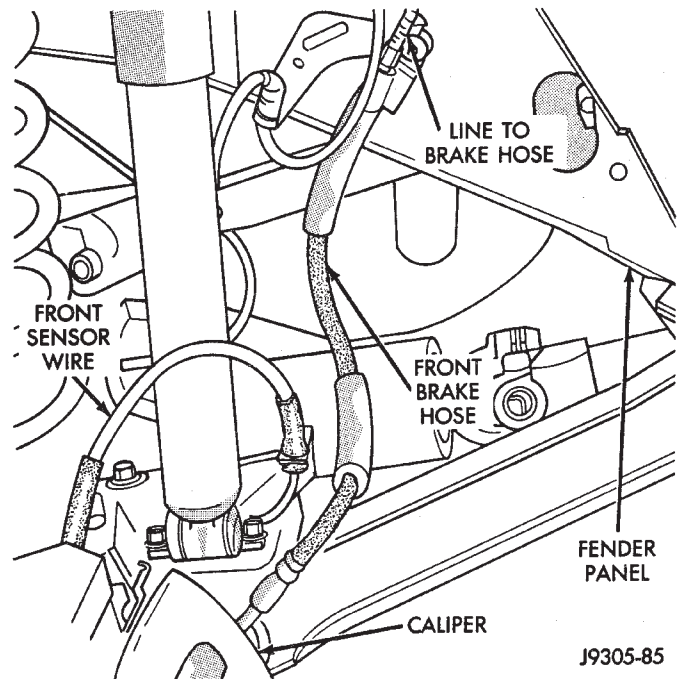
Correct Front Brake Hose Routing (Driver Side Shown)
